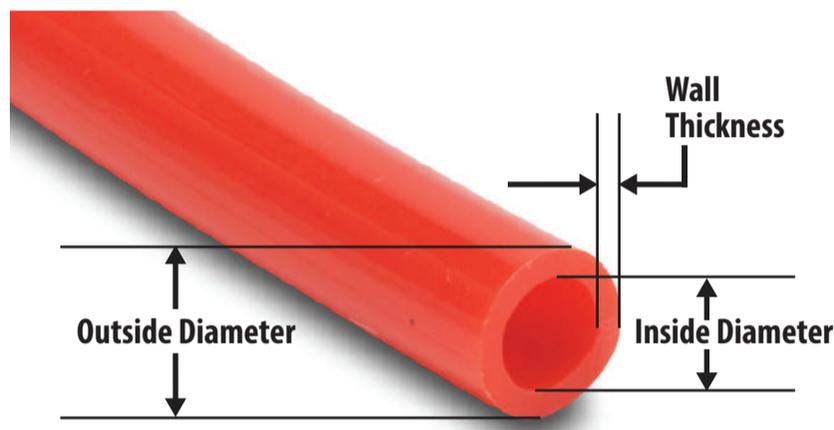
A: Important dimensions to know when specifying pneumatic tubing
